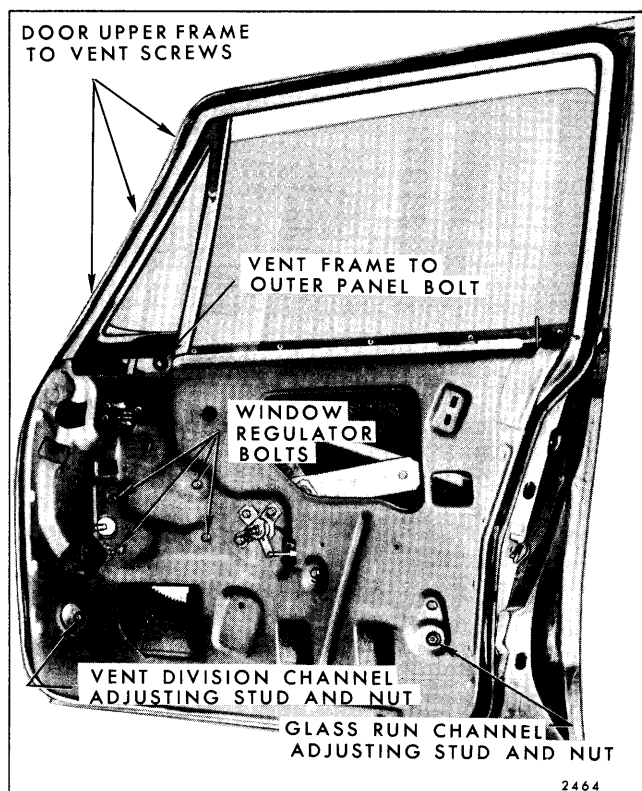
Door Ventilator and Regulator Attachment - "B" Styles Shown, "A" Styles Similar
